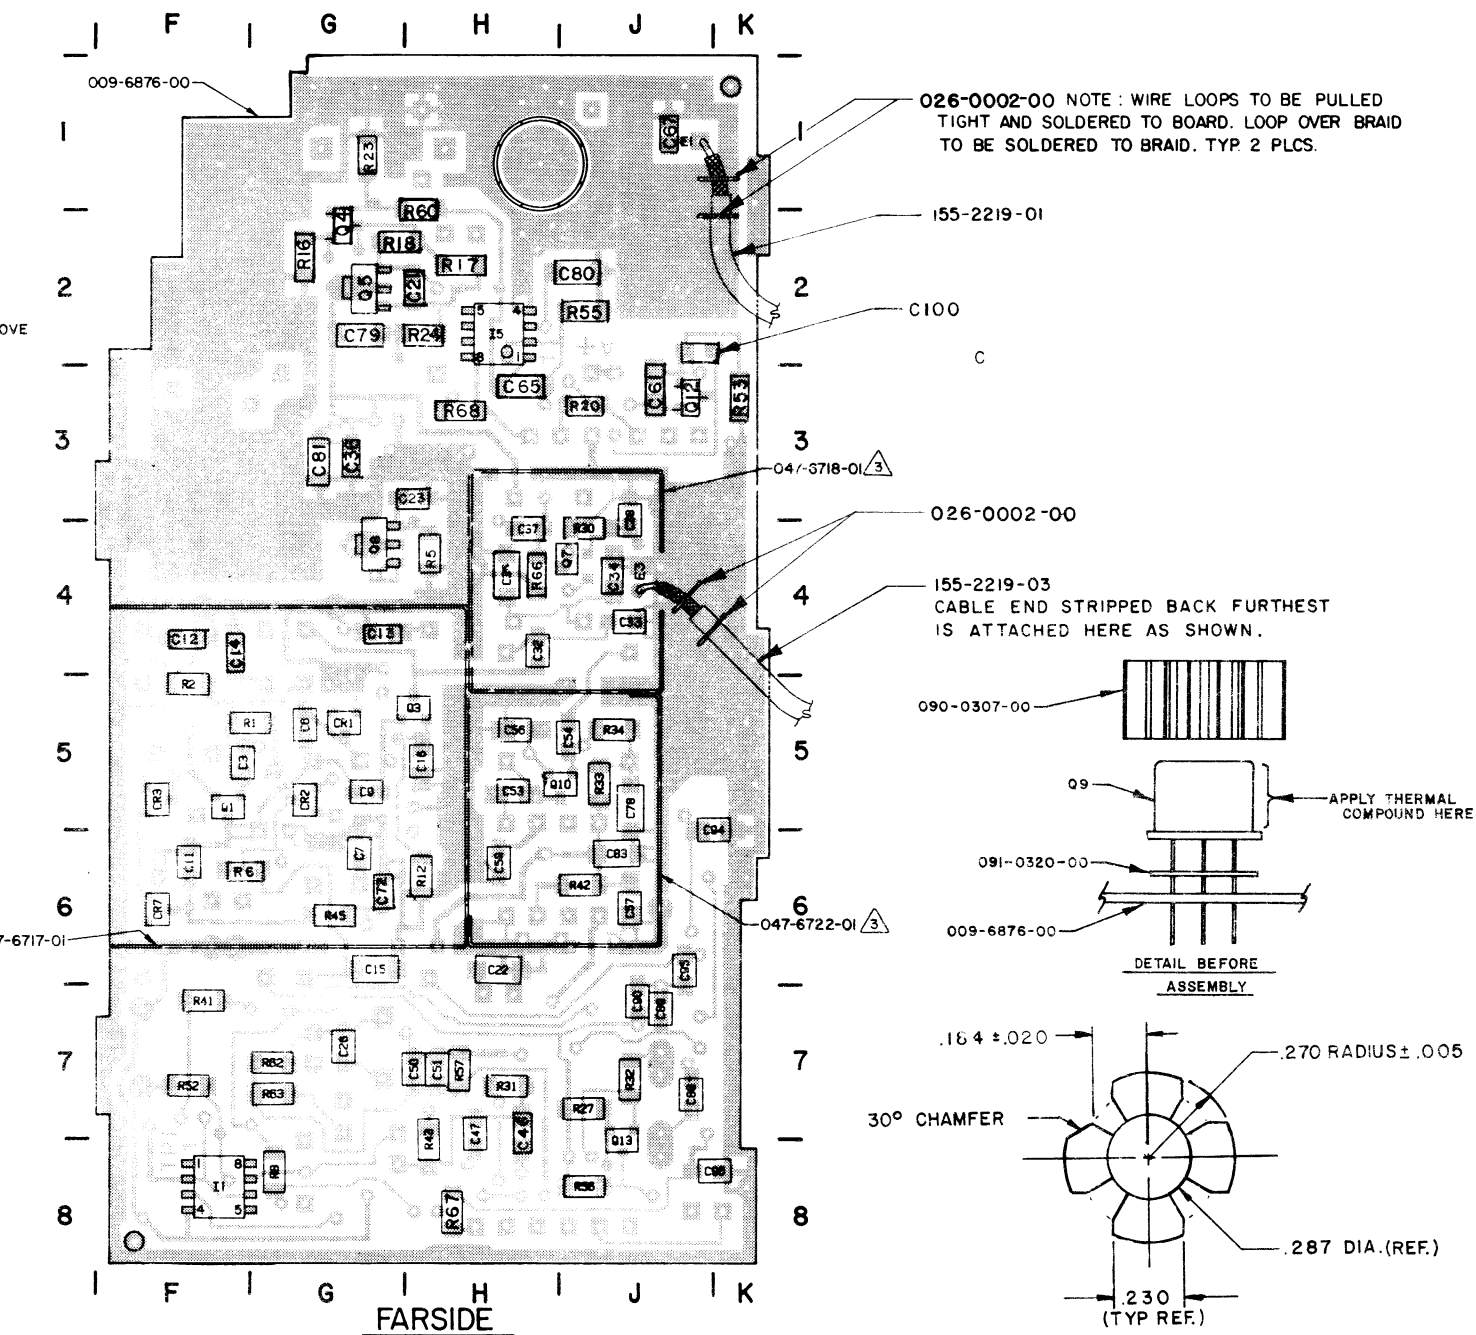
5 WATT TRANSMITTER BOARD ASSEMBLY
